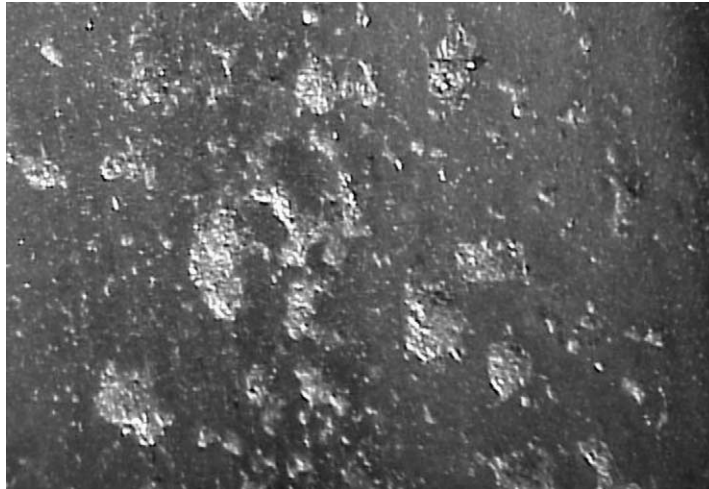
Surface defects caused by gravel indentation on a railway wheel.
